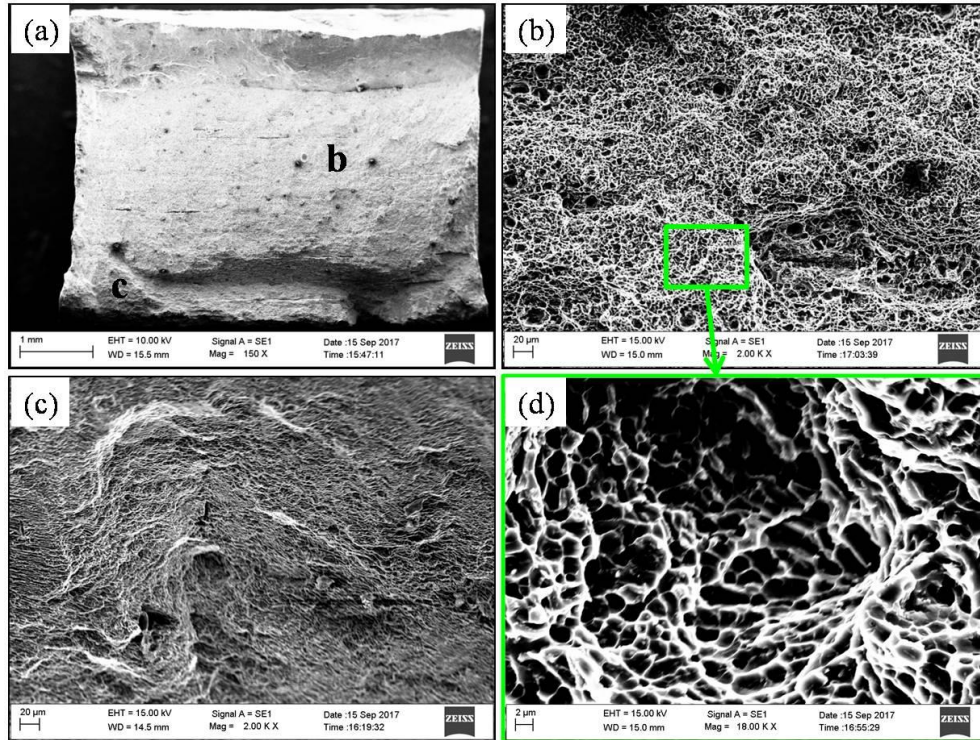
SEM images of fractured surface of tensile test specimen of EB weld with highest breaking load (a) whole fracture surface at low magnification (b), (c) and (d) high magnification fractographs of zones as indicated in (a) &(b)
